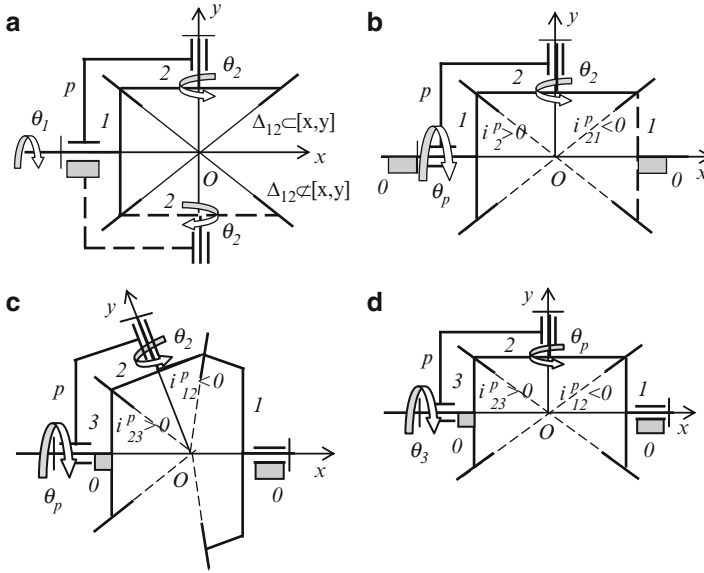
(a) Conical planetary gear-set with locked p. (b) Conical planetary gear-set with locked sun gear 1. (c) Conical planetary mechanism with two sun gears 1 and 3. (d) Conical planetary mechanism with two orthogonal gearings
